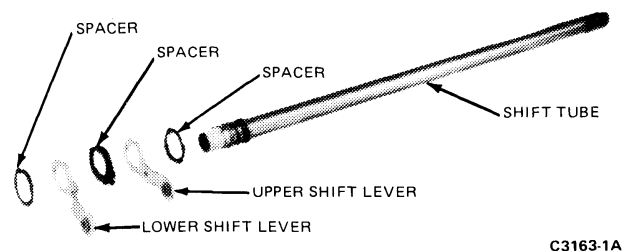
Shift Levers Disassembled—E-100—E-350, F-100—F-250
